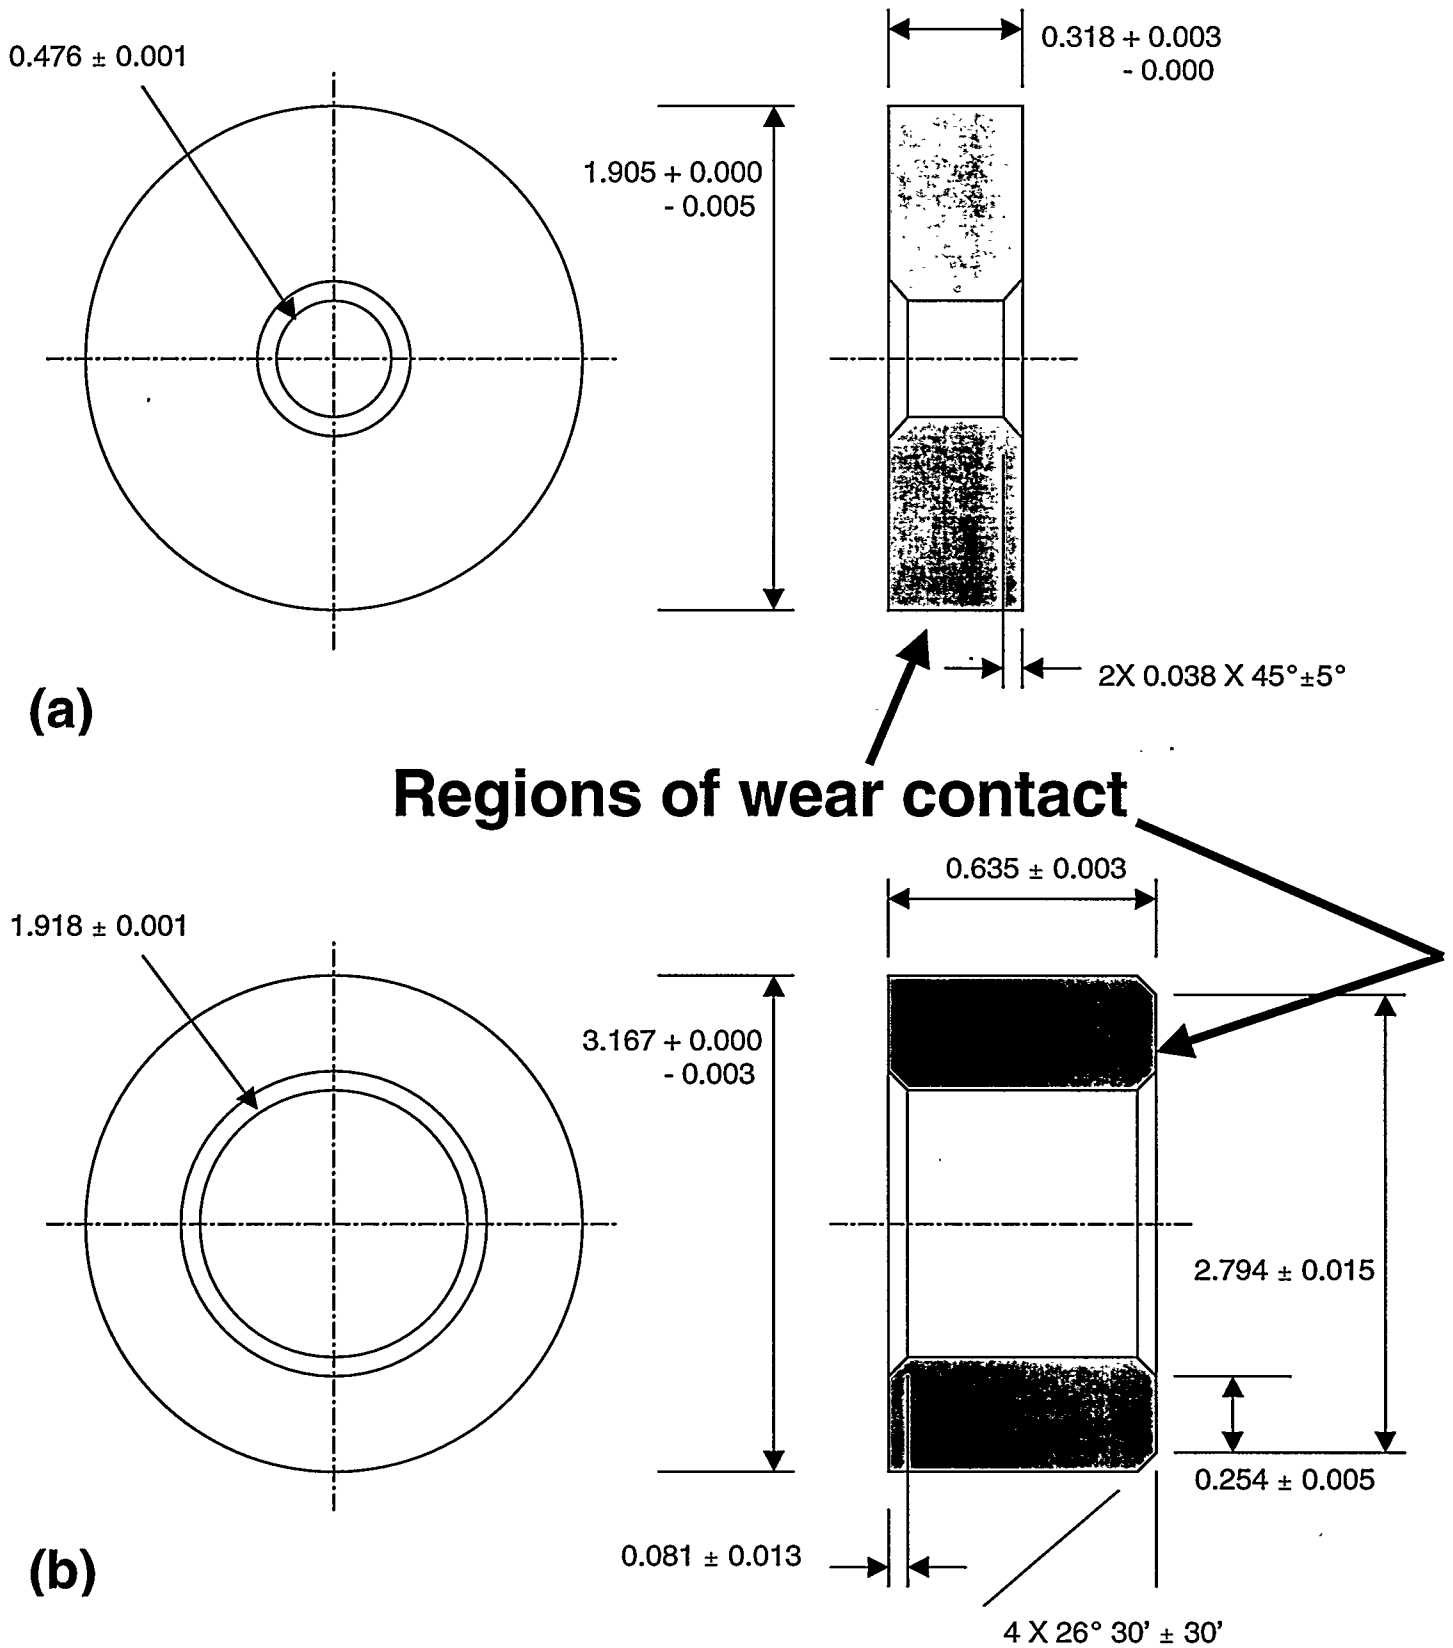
Schematic drawings of the specimens used in the Rolling Contact (RC) wear test: (a) Haynes 25 roller, and (b) 17-4 PH bushing. The regions of wear contact for the RC test are indicated. All dimensions are in cm.
